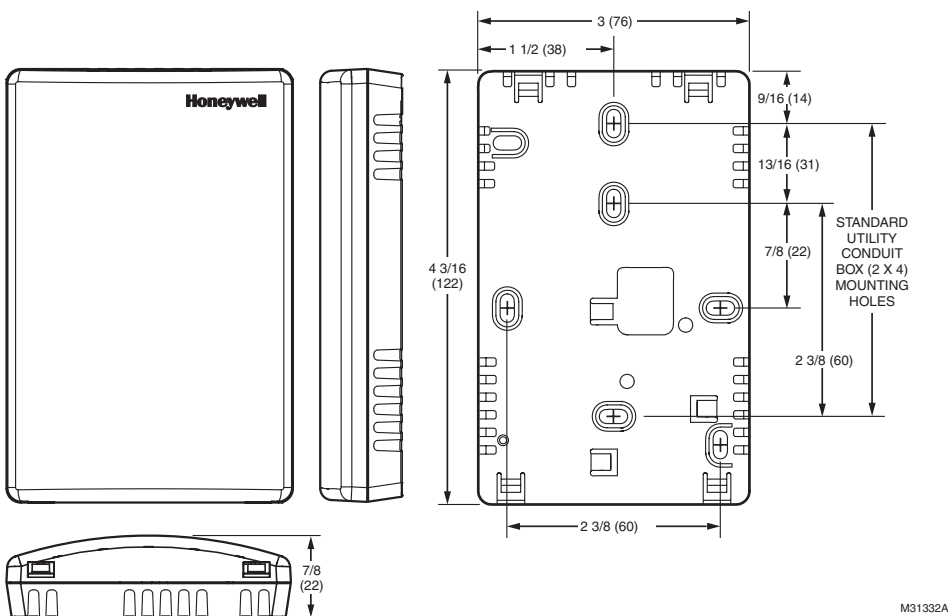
Wall-mount Sensor Dimensions in In (mm).
